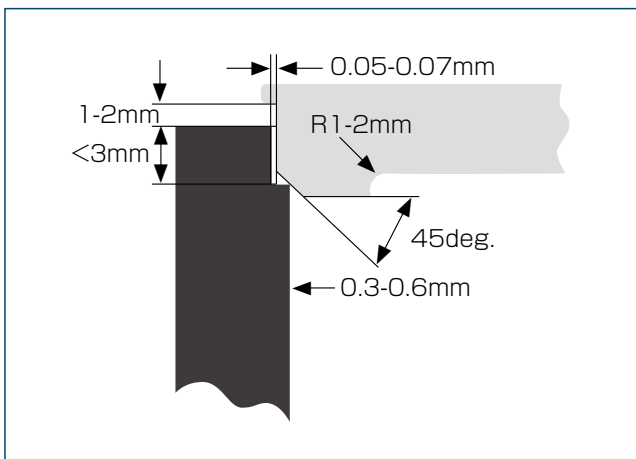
Typical design of shear joint by the ultrasonic welding
